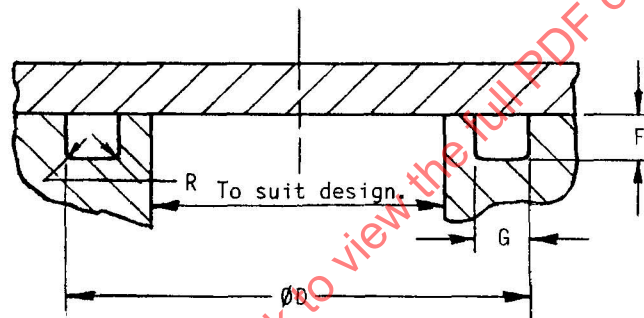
Axial C-Ring Groove, Internal Pressure
